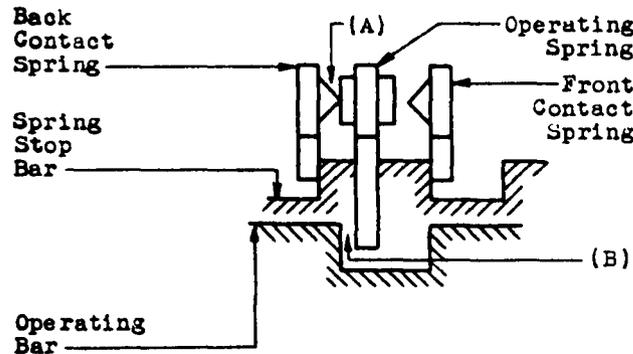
Operating Spring Pressure and Clearance Between Operating Spring and Operating Bar - Transfer Spring Combination
